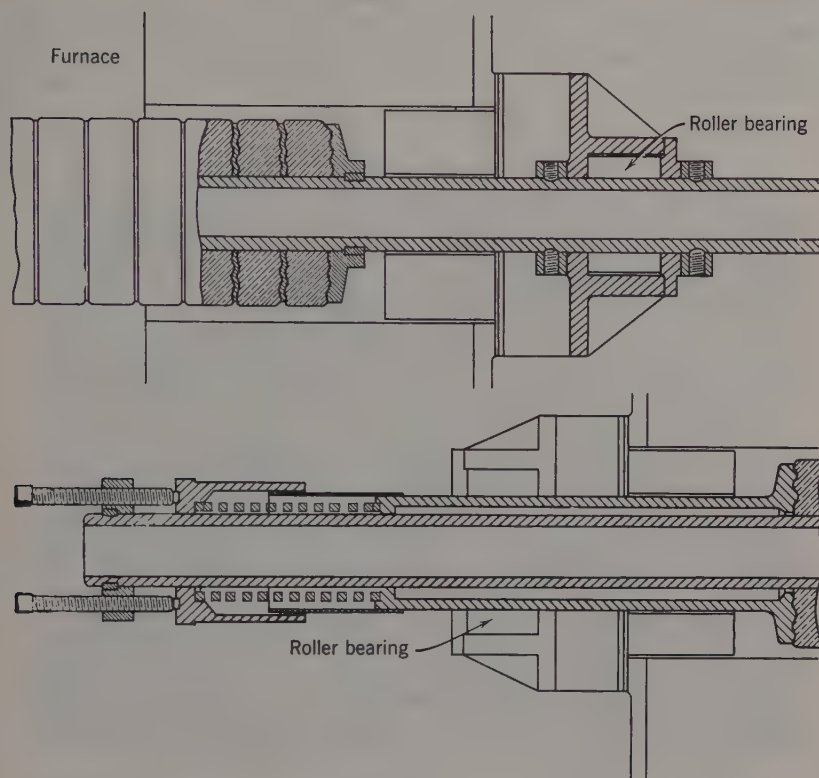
Refractory furnace roller with provision to prevent spalling.
